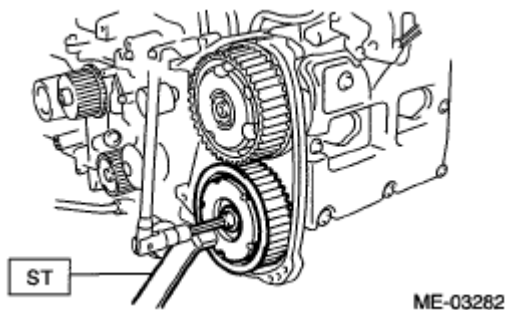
Removing/Installing Cam Sprocket Using ST 499207400
